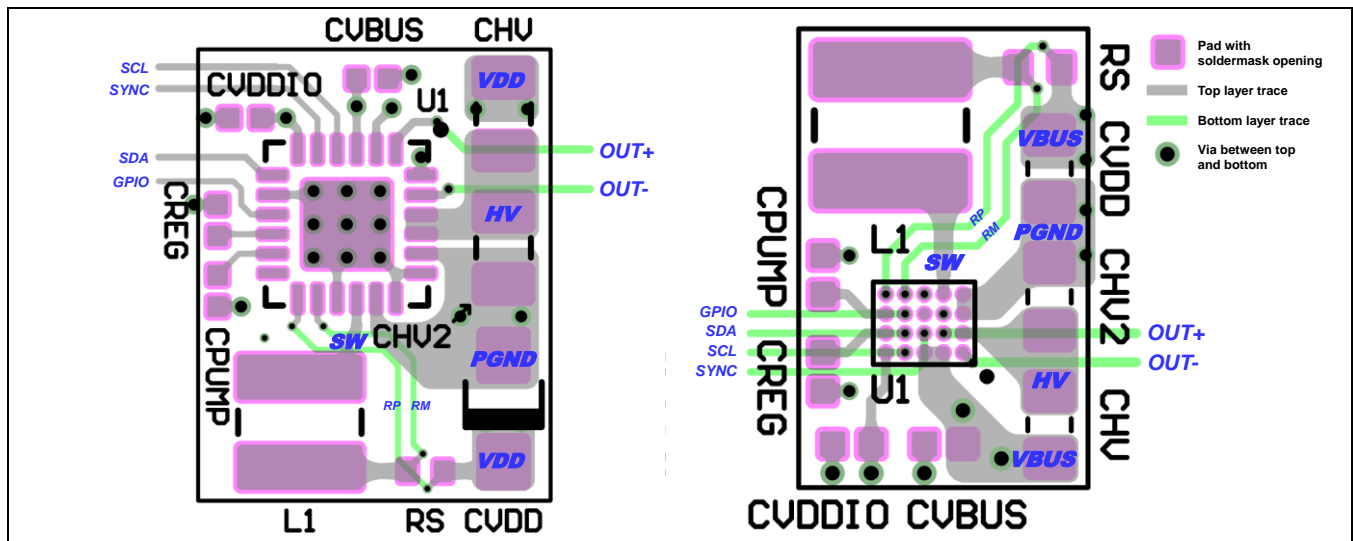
UPI configuration PCB layout examples for QFN 24L 4.0mm × 4.0mm (left) and typical configuration for WLCSP 20B 2.1mm × 1.7mm (right)
